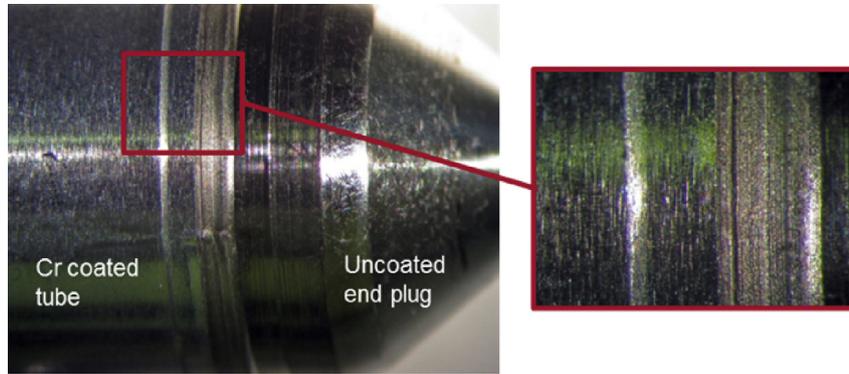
Visual examination of a weld using AREVA's USW process showing no flaws of the weld. USW, upset-shape welding.
